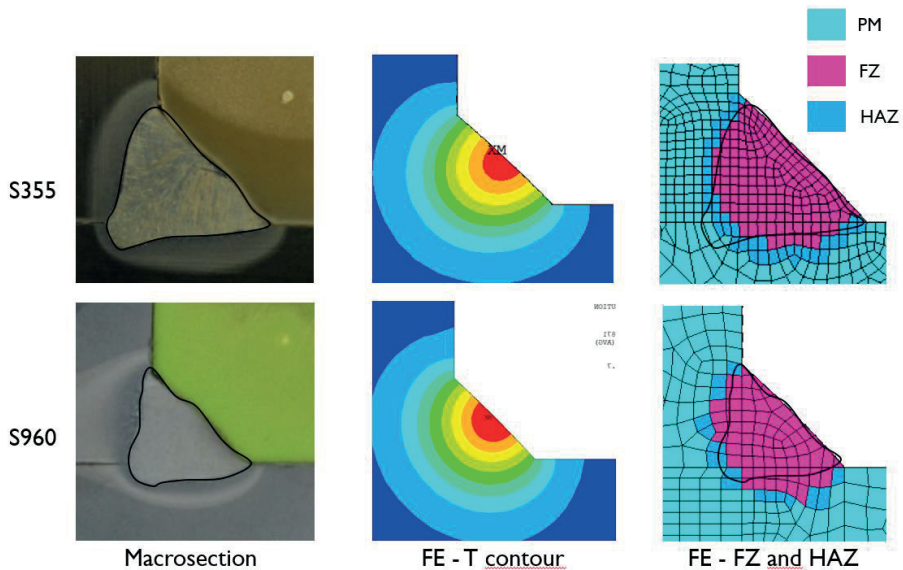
Macrosections of the investigated fillet welds taken by IWM [146] – Measurement of the weld pool size
